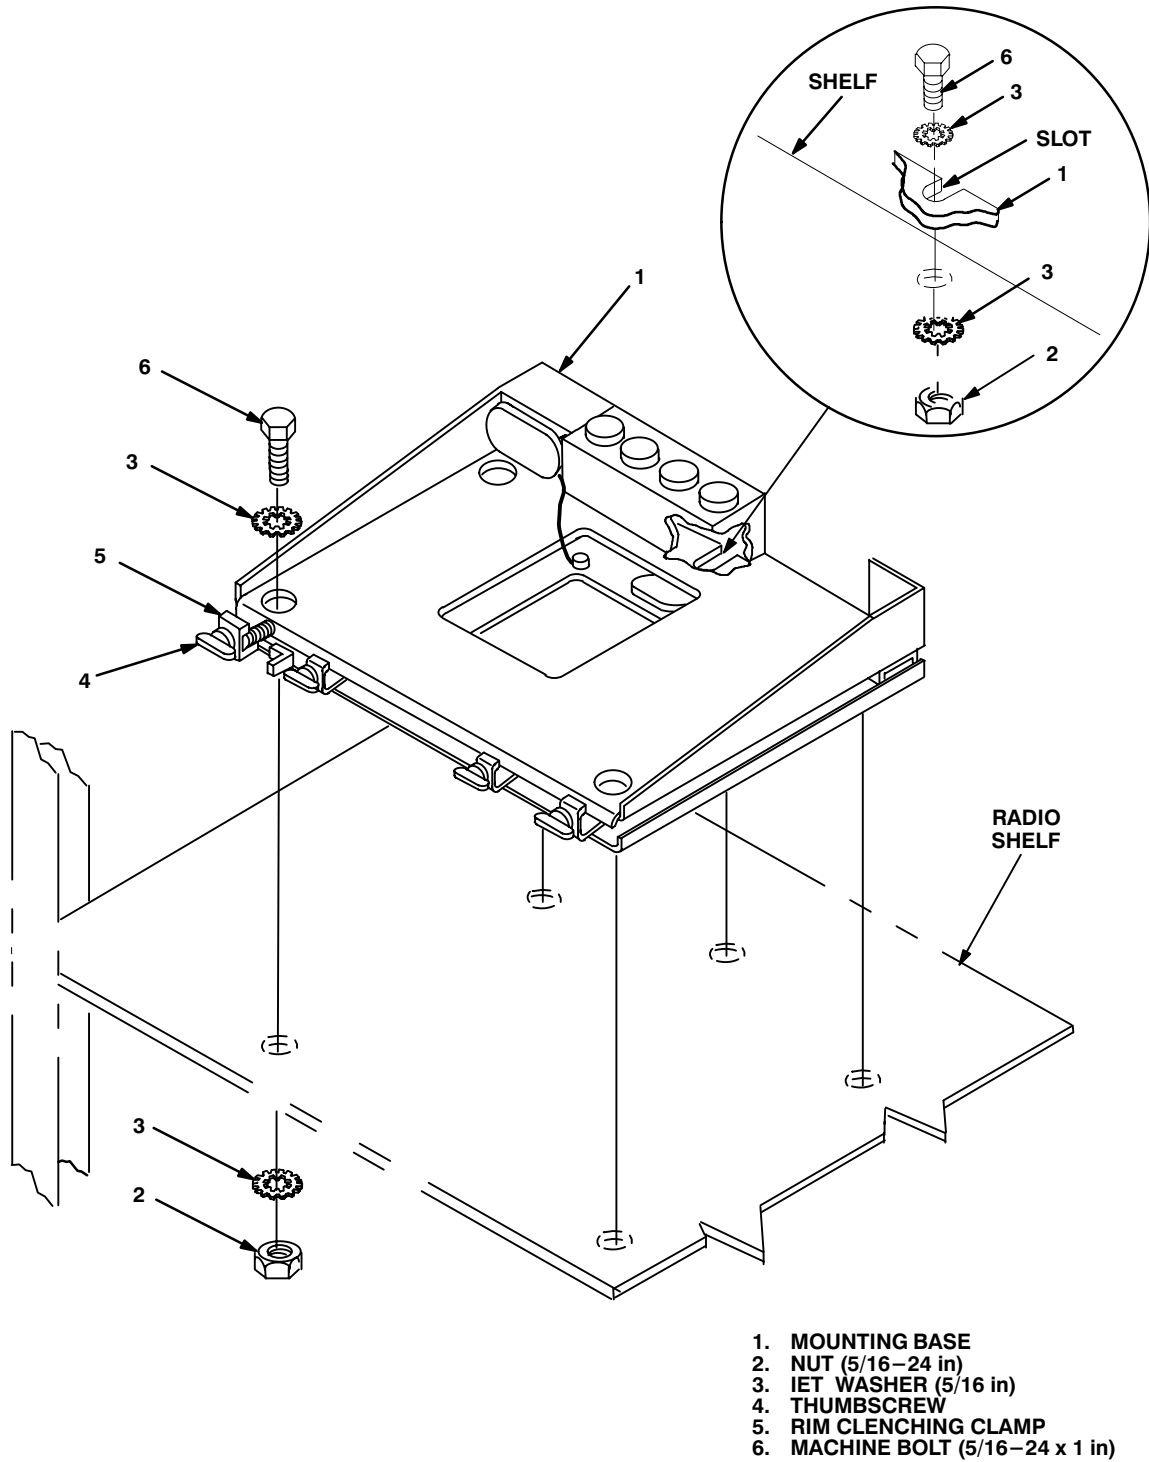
Mounting Base Installation: Curbside Equipment Rack
